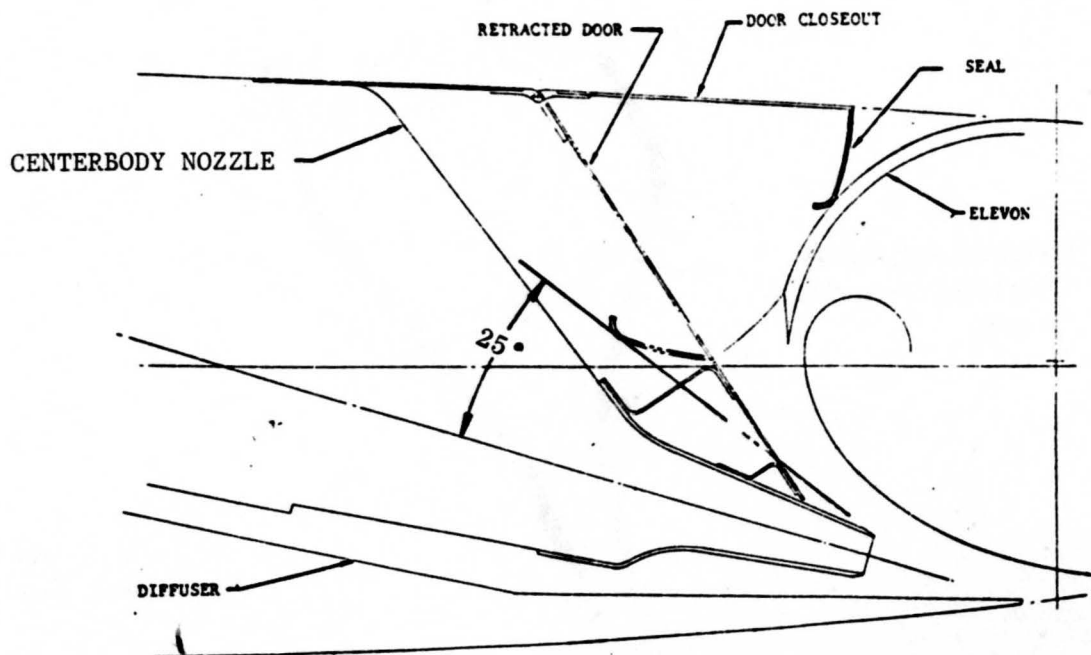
Typical Cross-Section of the Centerbody Nozzle
